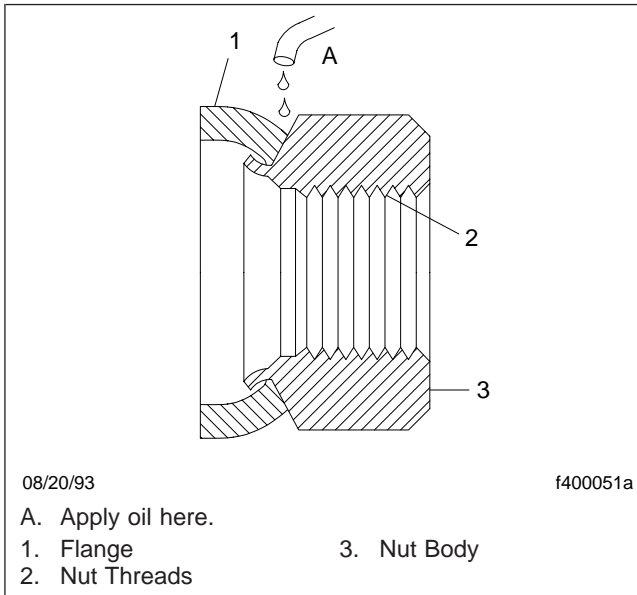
, Two-Piece Flange Nut (10-hole disc wheels)
